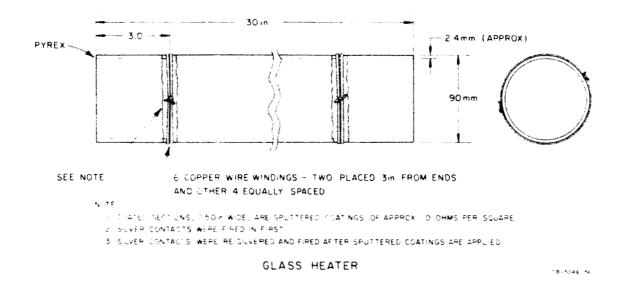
DESIGN DRAWING FOR GLASS HEATER FOR 8-MONTH-STORAGE TEST UNITS
